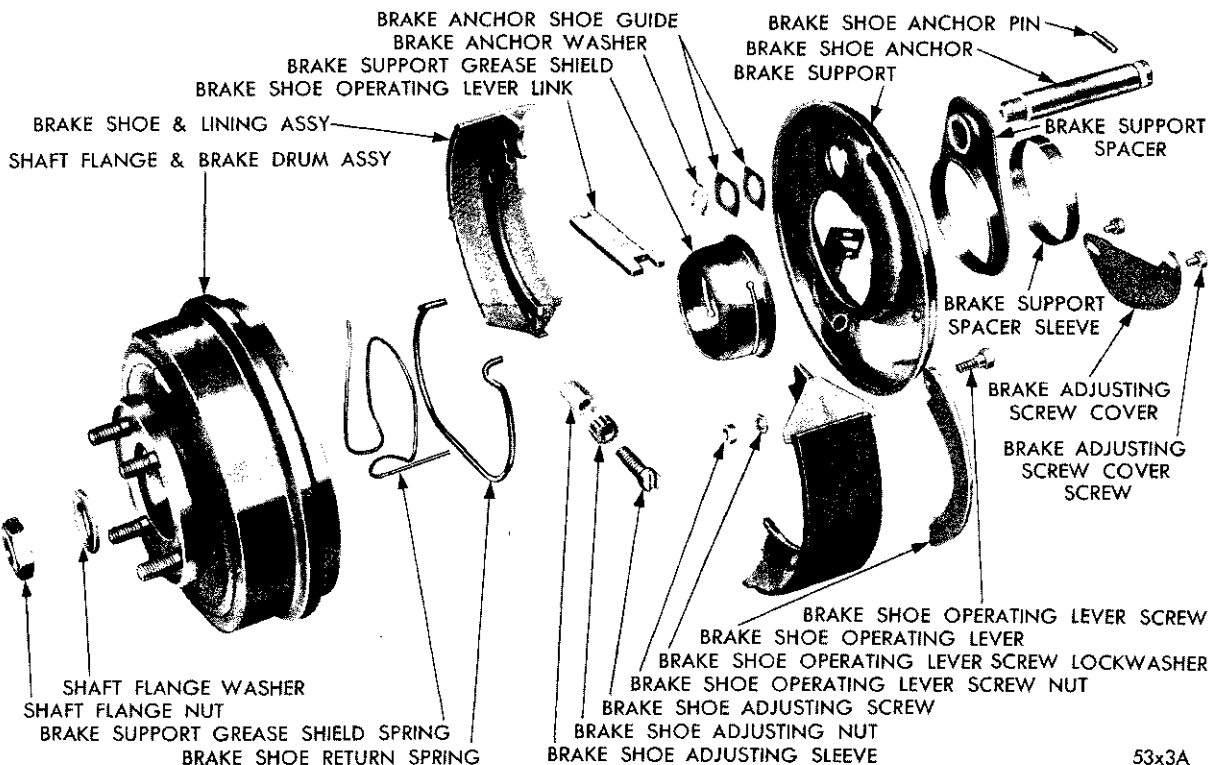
Internal Expanding Hand Brake (Disassembled View)
